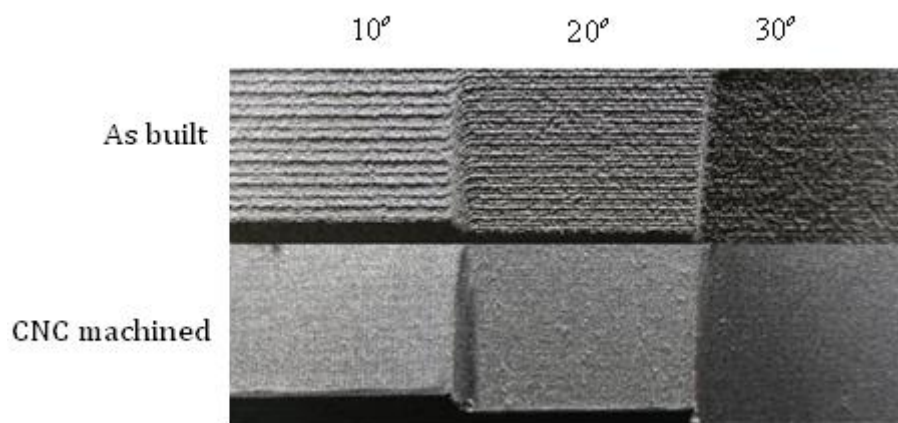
Improvement of surface finish of Alumide® test piece by CNC machining
